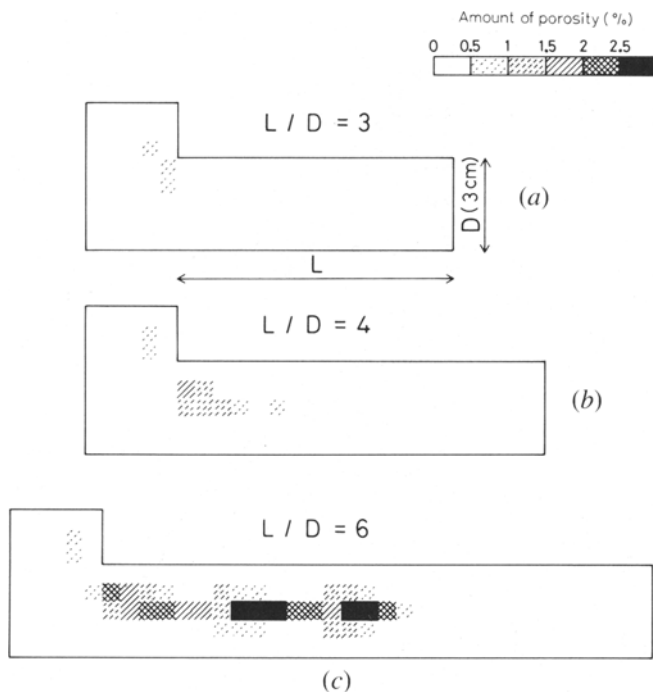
Calculated amount of porosity in steel plate castings (0.14 pct C, 0.30 pct Si) poured into sand molds
